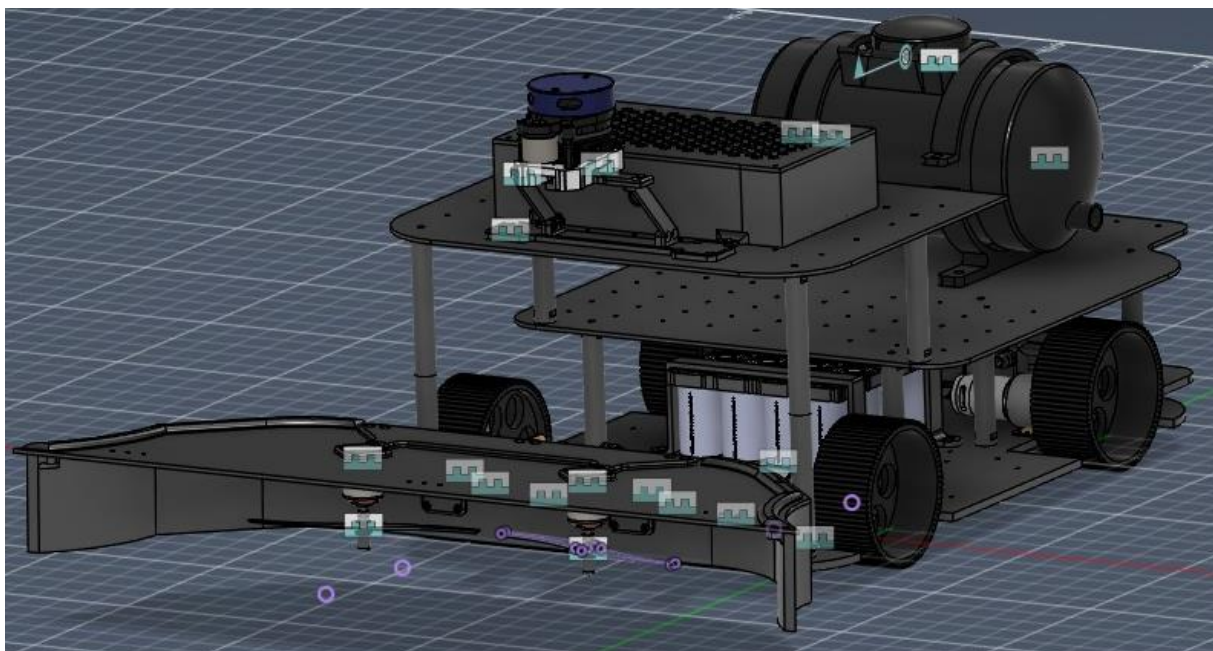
AgroBot CAD Assembly - Isometric view showing three-layer chassis, sensor placement, and cutting deck
